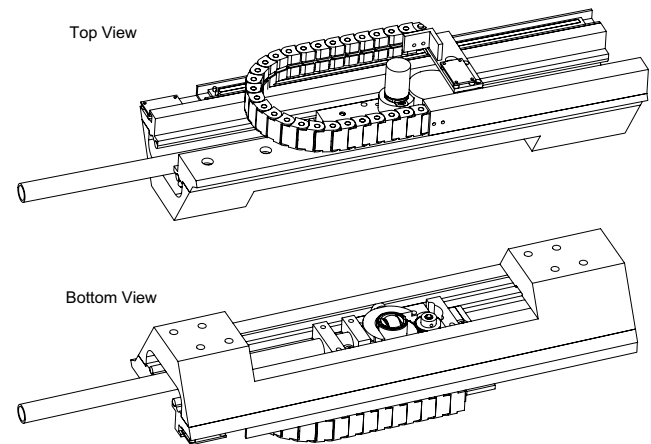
Top and bottom isometric views of a linear actuation assembly.
